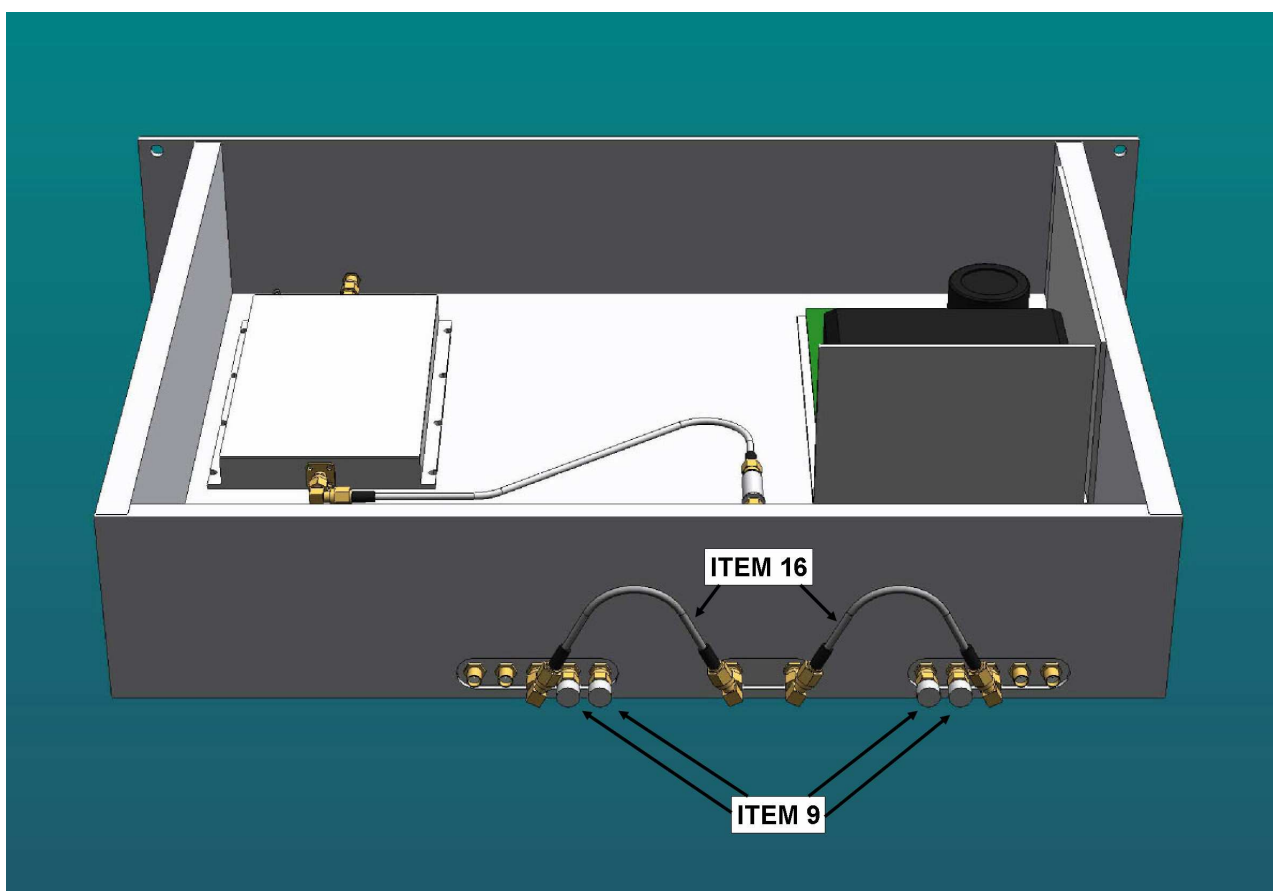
Fixed LO: central rack mechanical assembling (back view).
